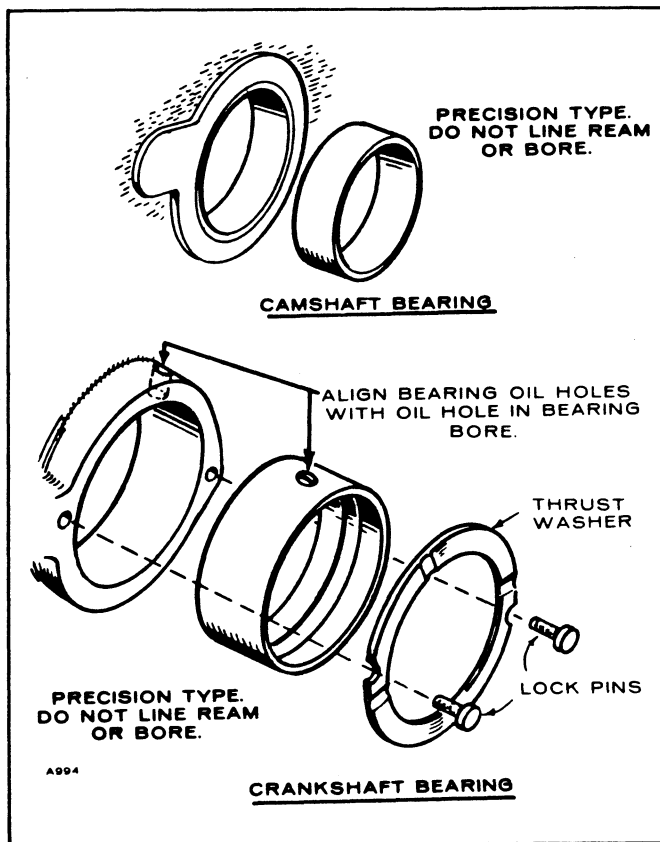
CAMSHAFT AND CRANKSHAFT BEARINGS
